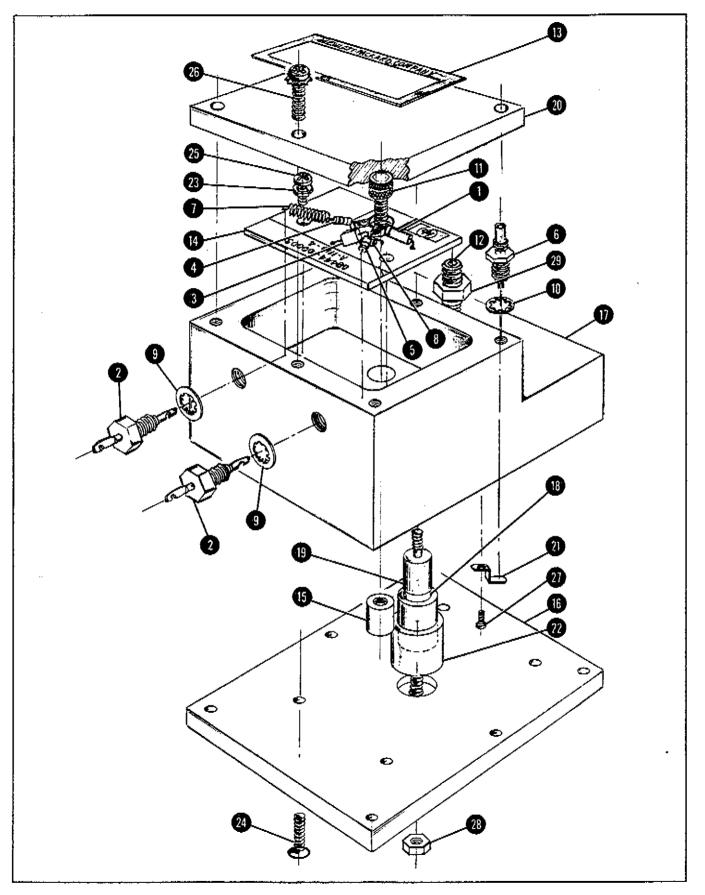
A7 1.55 GHz Oscillator Assembly, Illustrated Parts Breakdown (1 of 2)
